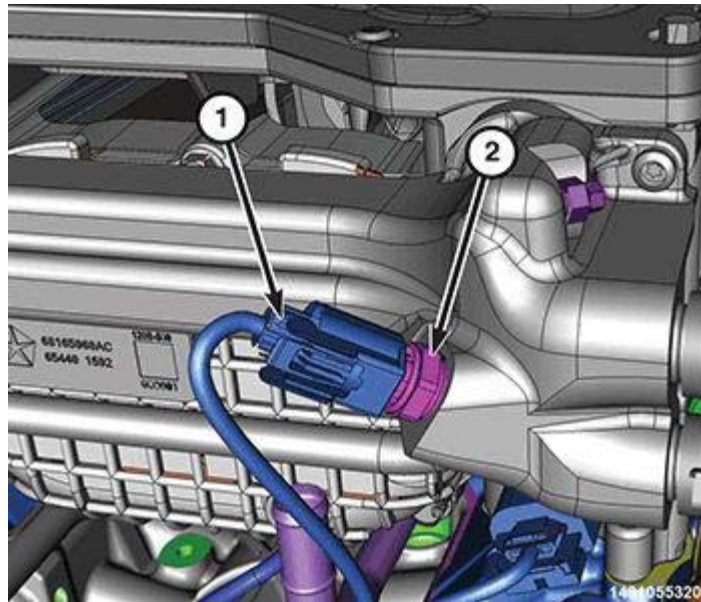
Charger Air Cooler Temperature Sensor & Wire Harness Connector
